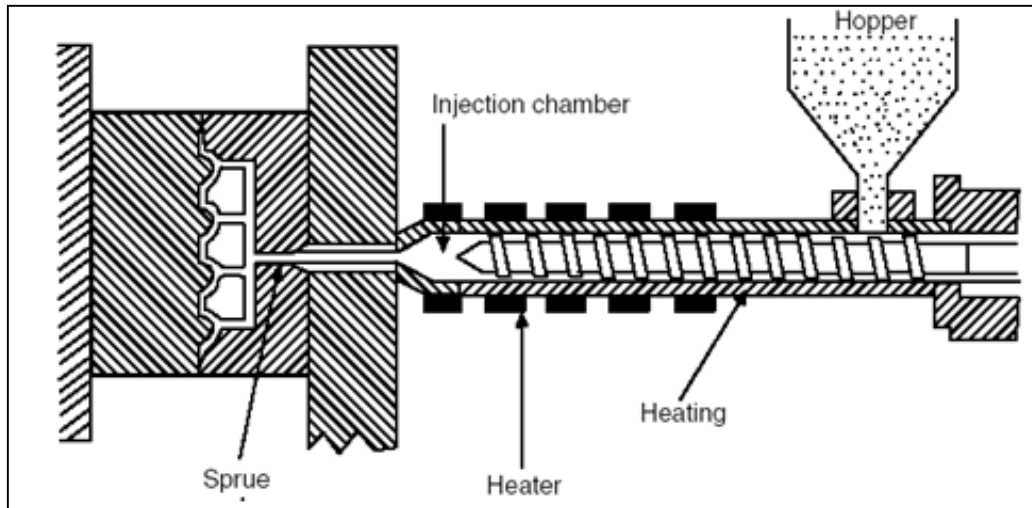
Schematic Diagram of a Screw - Injection Molding Machine
